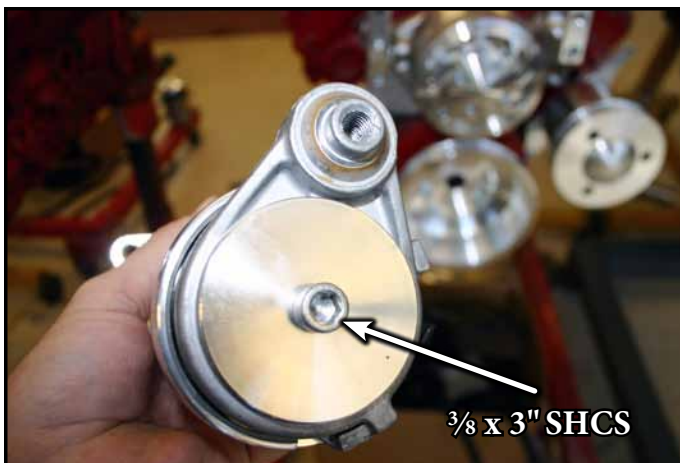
1. Hold Tensioner Body in a vise to remove bolt & washer from tensioner pulley. Note: Bolt is a left handed thread, turn clockwise to remove. Install the Tensioner into the 20256-B Bracket cover use a $\frac{3}{8}$ x $3\frac{1}{4}$ " SHCS and install the (781-A) cover as shown and bolt into place.
